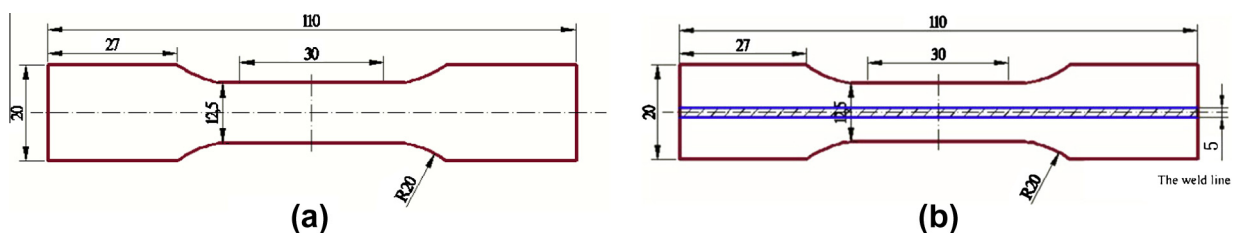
Schematic showing the geometry and dimensions of the DP steel specimens for uniaxial tension (unit: mm): (a) the specimen of base material and (b) a typical laser-welding specimen along the longitudinal direction.
